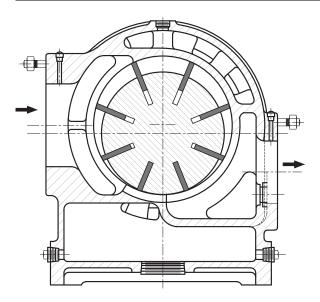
Sectional of a sliding vane rotary compressor. Courtesy of GE Energy.
